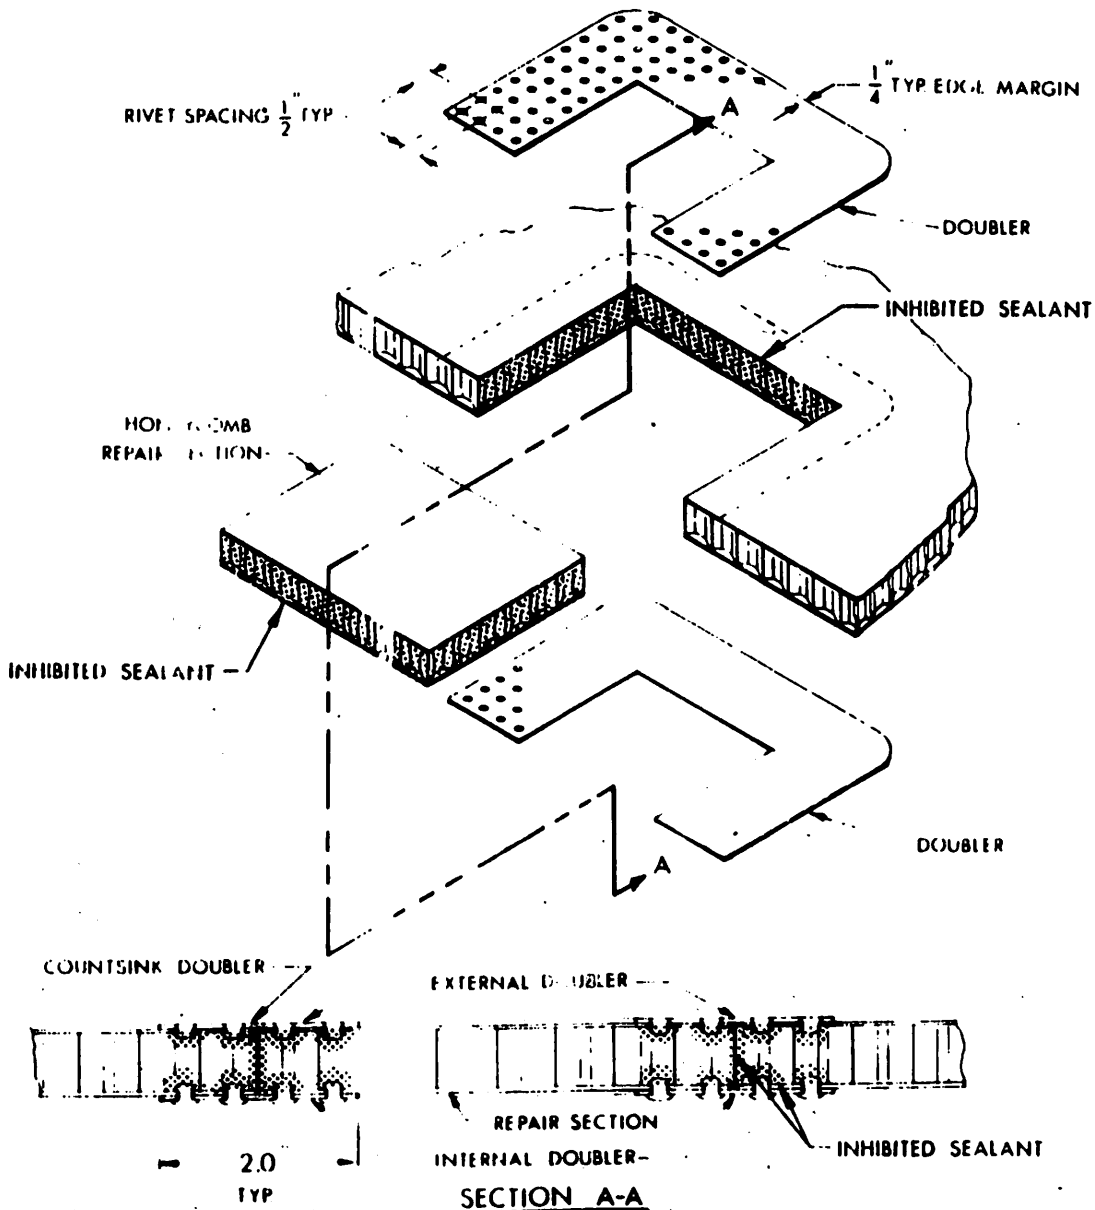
Honeycomb Repair, External Doubler (Riveted)
